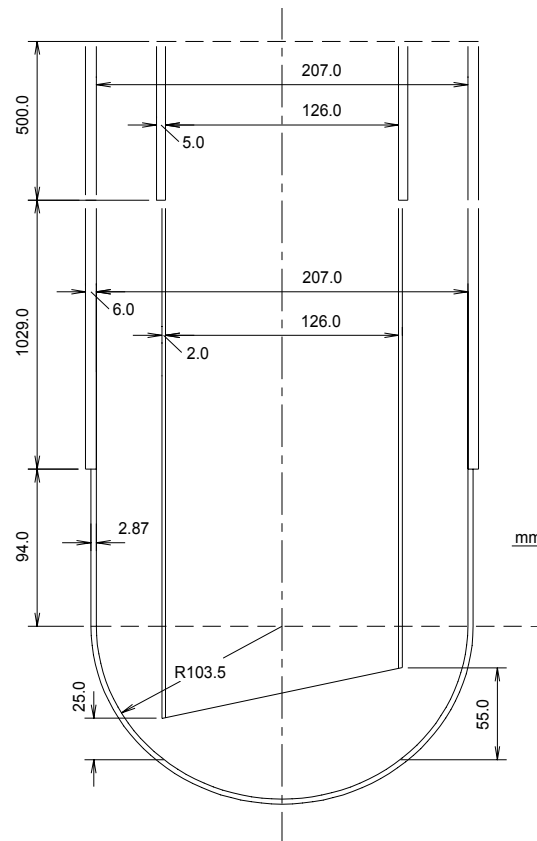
Cross-section through lower test-section with 20-mm guide-tube/window gap.
